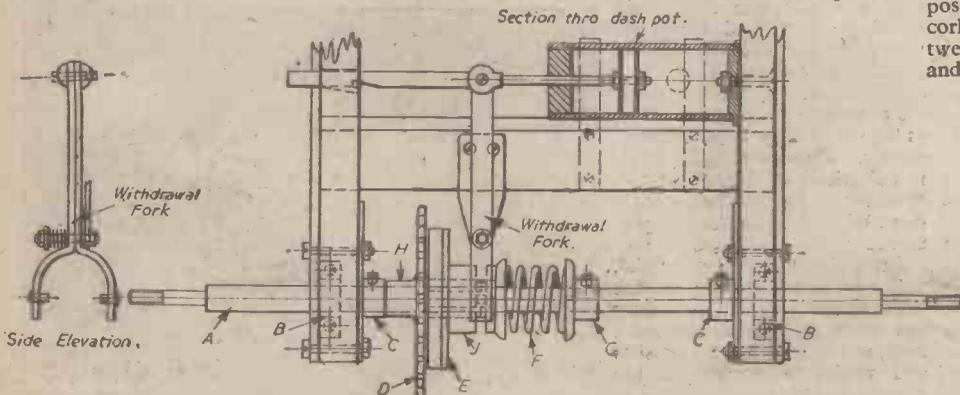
Part sectional plan of rear axle and clutch assembly, and detail of clutch withdrawal fork. Fig. 7.—Wheel and hub details. (Half full size.)
